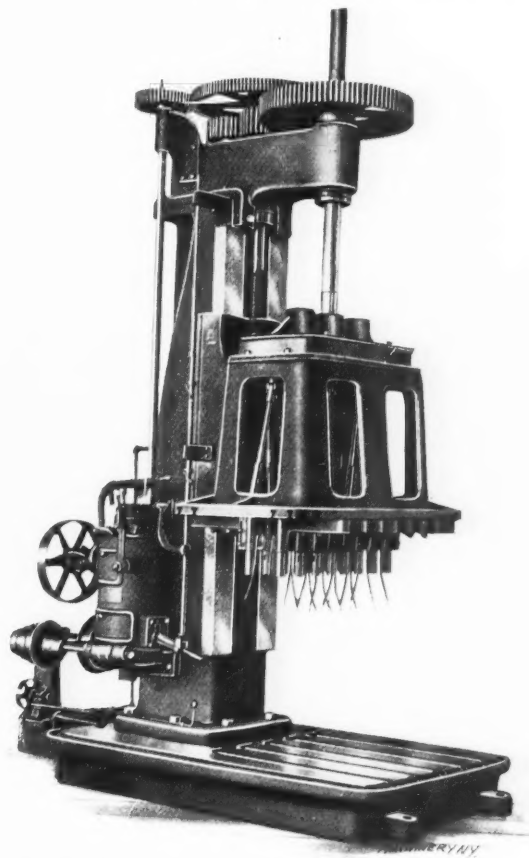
Sixteen-spindle Baush Vertical Drilling Machine.
